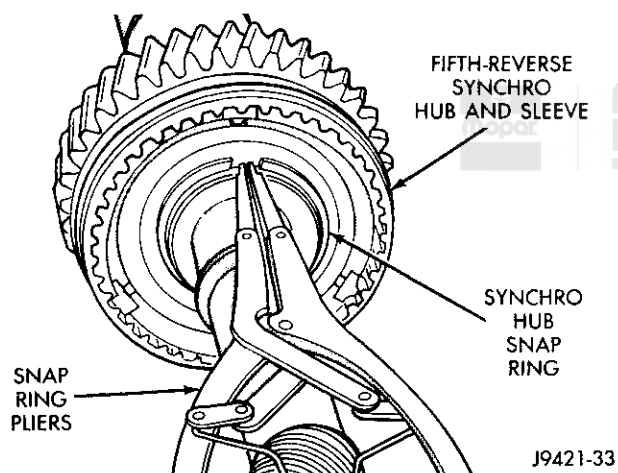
Fifth-Reverse Synchro Hub Snap Ring Removal
